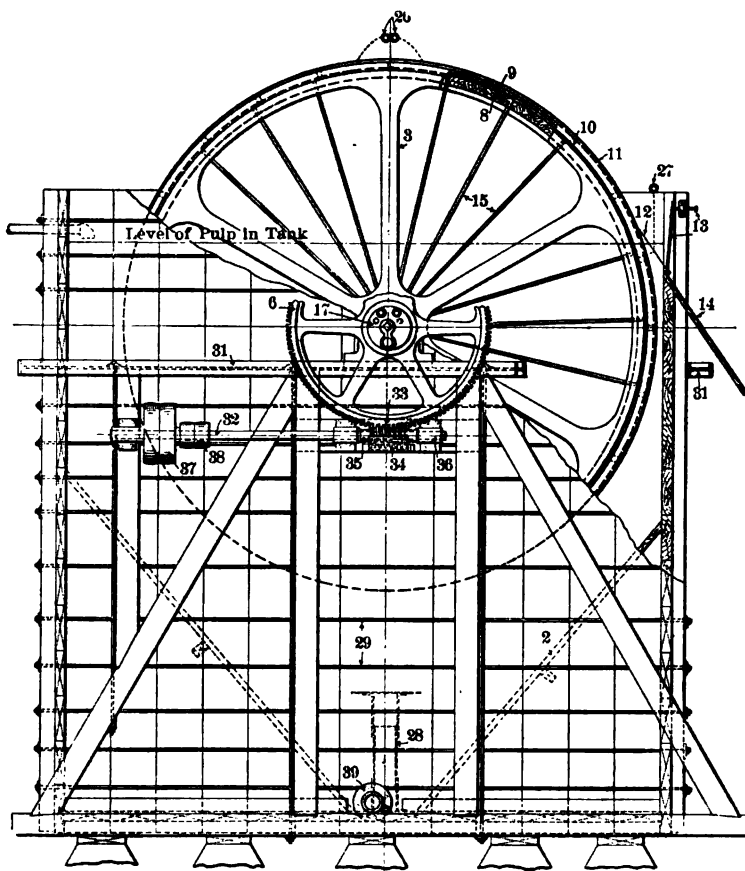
OLIVER FILTER. LONGITUDINAL SECTION AND ELEVATION.
